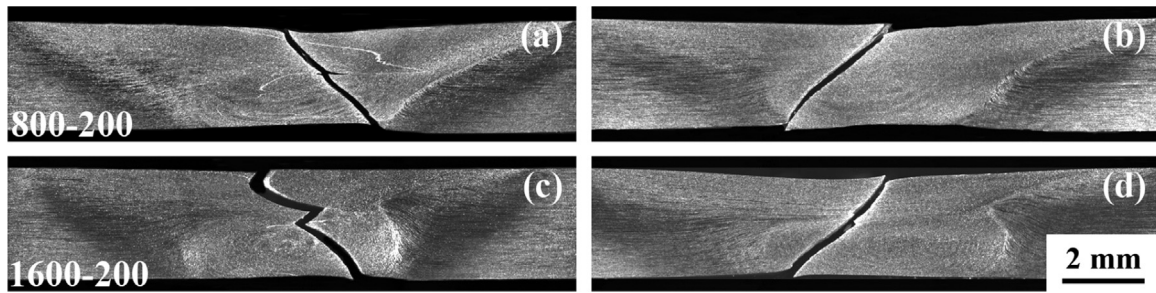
Fracture locations of FSW 2198-T8 welds (rpm-mm/min): (a) and (c) butt welds; (b) and (d) bead-on-plate welds.
